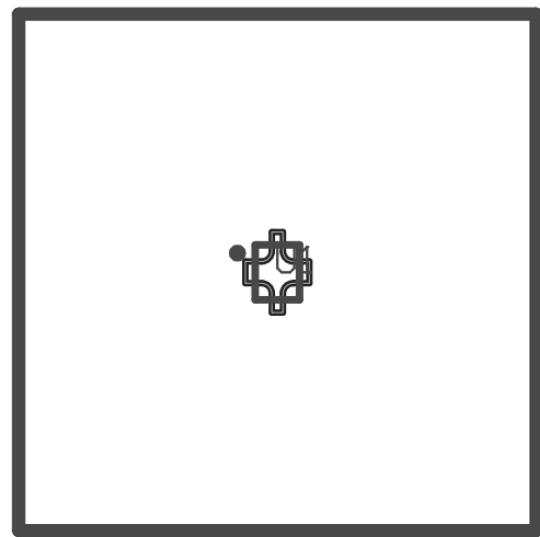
PCB Bottom-Layer Assembly Drawing
